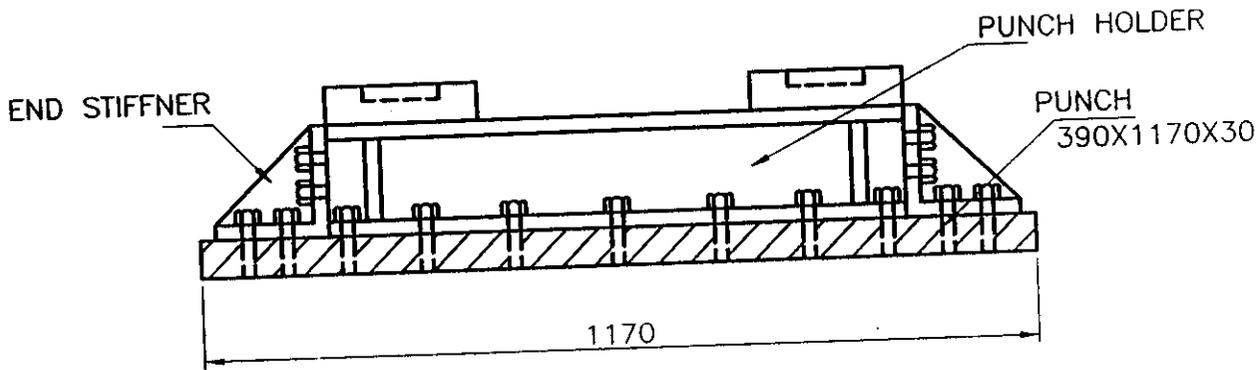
PUNCH ASSEMBLY FOR STANDARD SIZE
